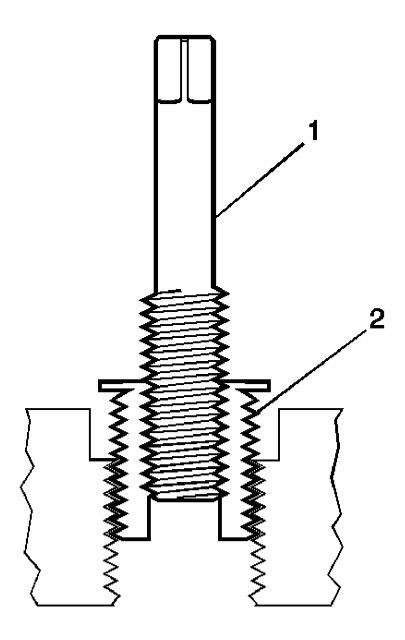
Installing Insert - Recessed Thread Courtesy of GENERAL MOTORS CORP.
